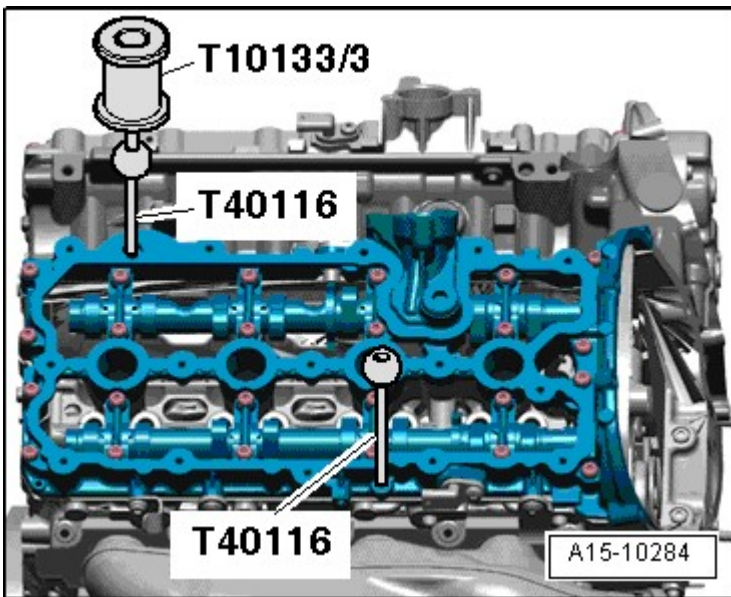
Identifying Guide Frame Securing Pins T40116 With Impact Puller T10133/3
